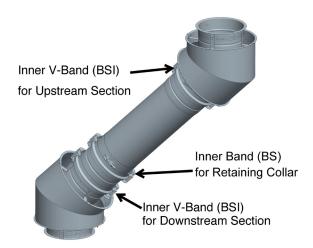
Step 10-11 - Secure the Retaining Flanged Band
